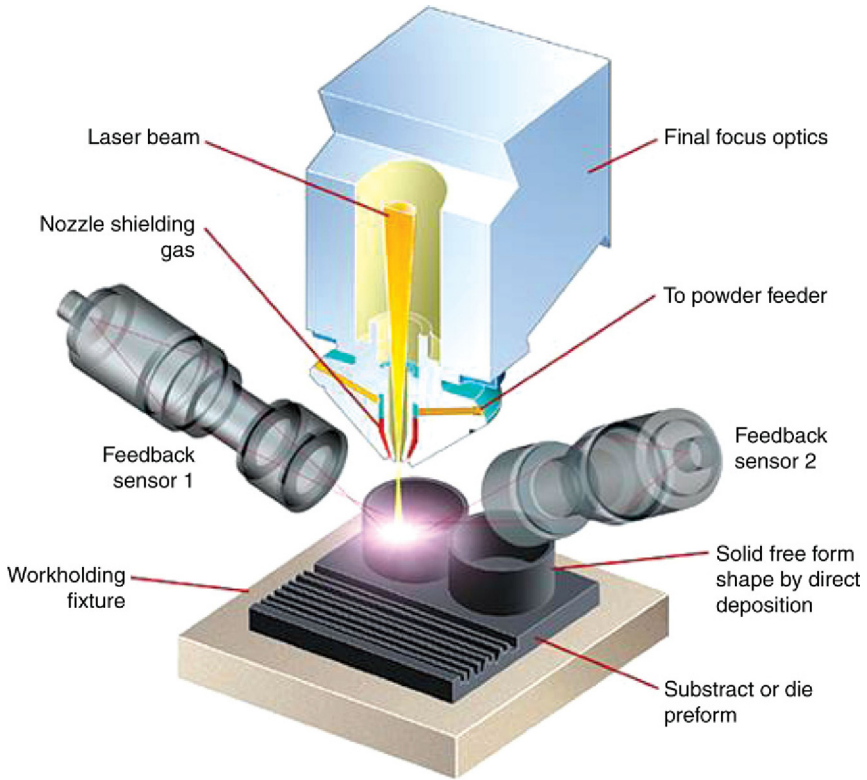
Schematic showing direct metal deposition (DMD) technology. (Courtesy DM3D Technology.)
